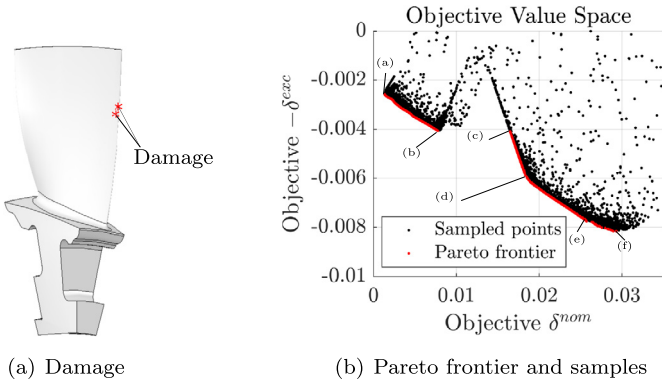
Damaged blisk sector (a) and Pareto frontier (b) for example 1.
